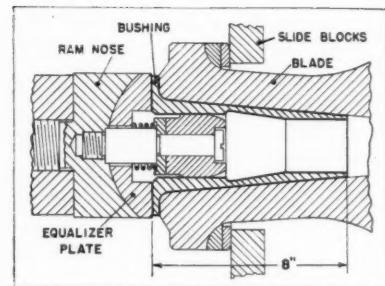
Cross-section of airplane propeller-blade hub with cone-shaped bushing forced into place by press shown in Fig. 1
